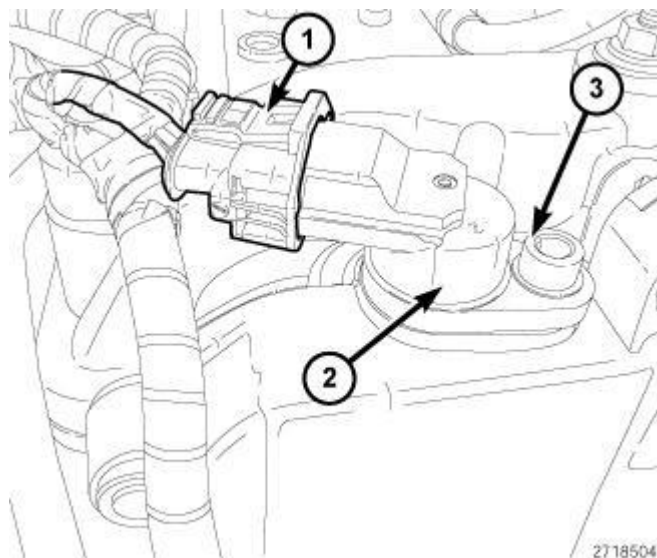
Camshaft Position Sensor Harness Connector, Sensor & Bolt
